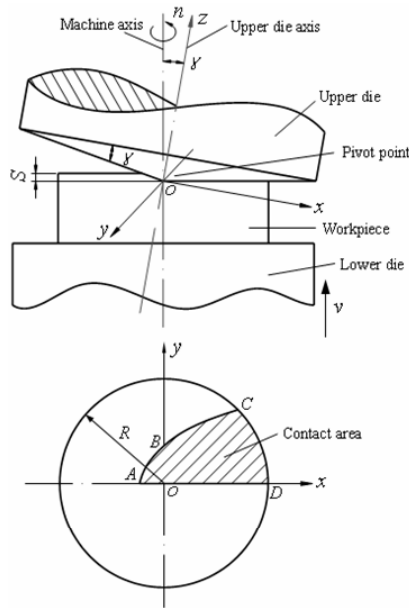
Schematic diagram of cold rotary forging of the cylindrical workpiece.
